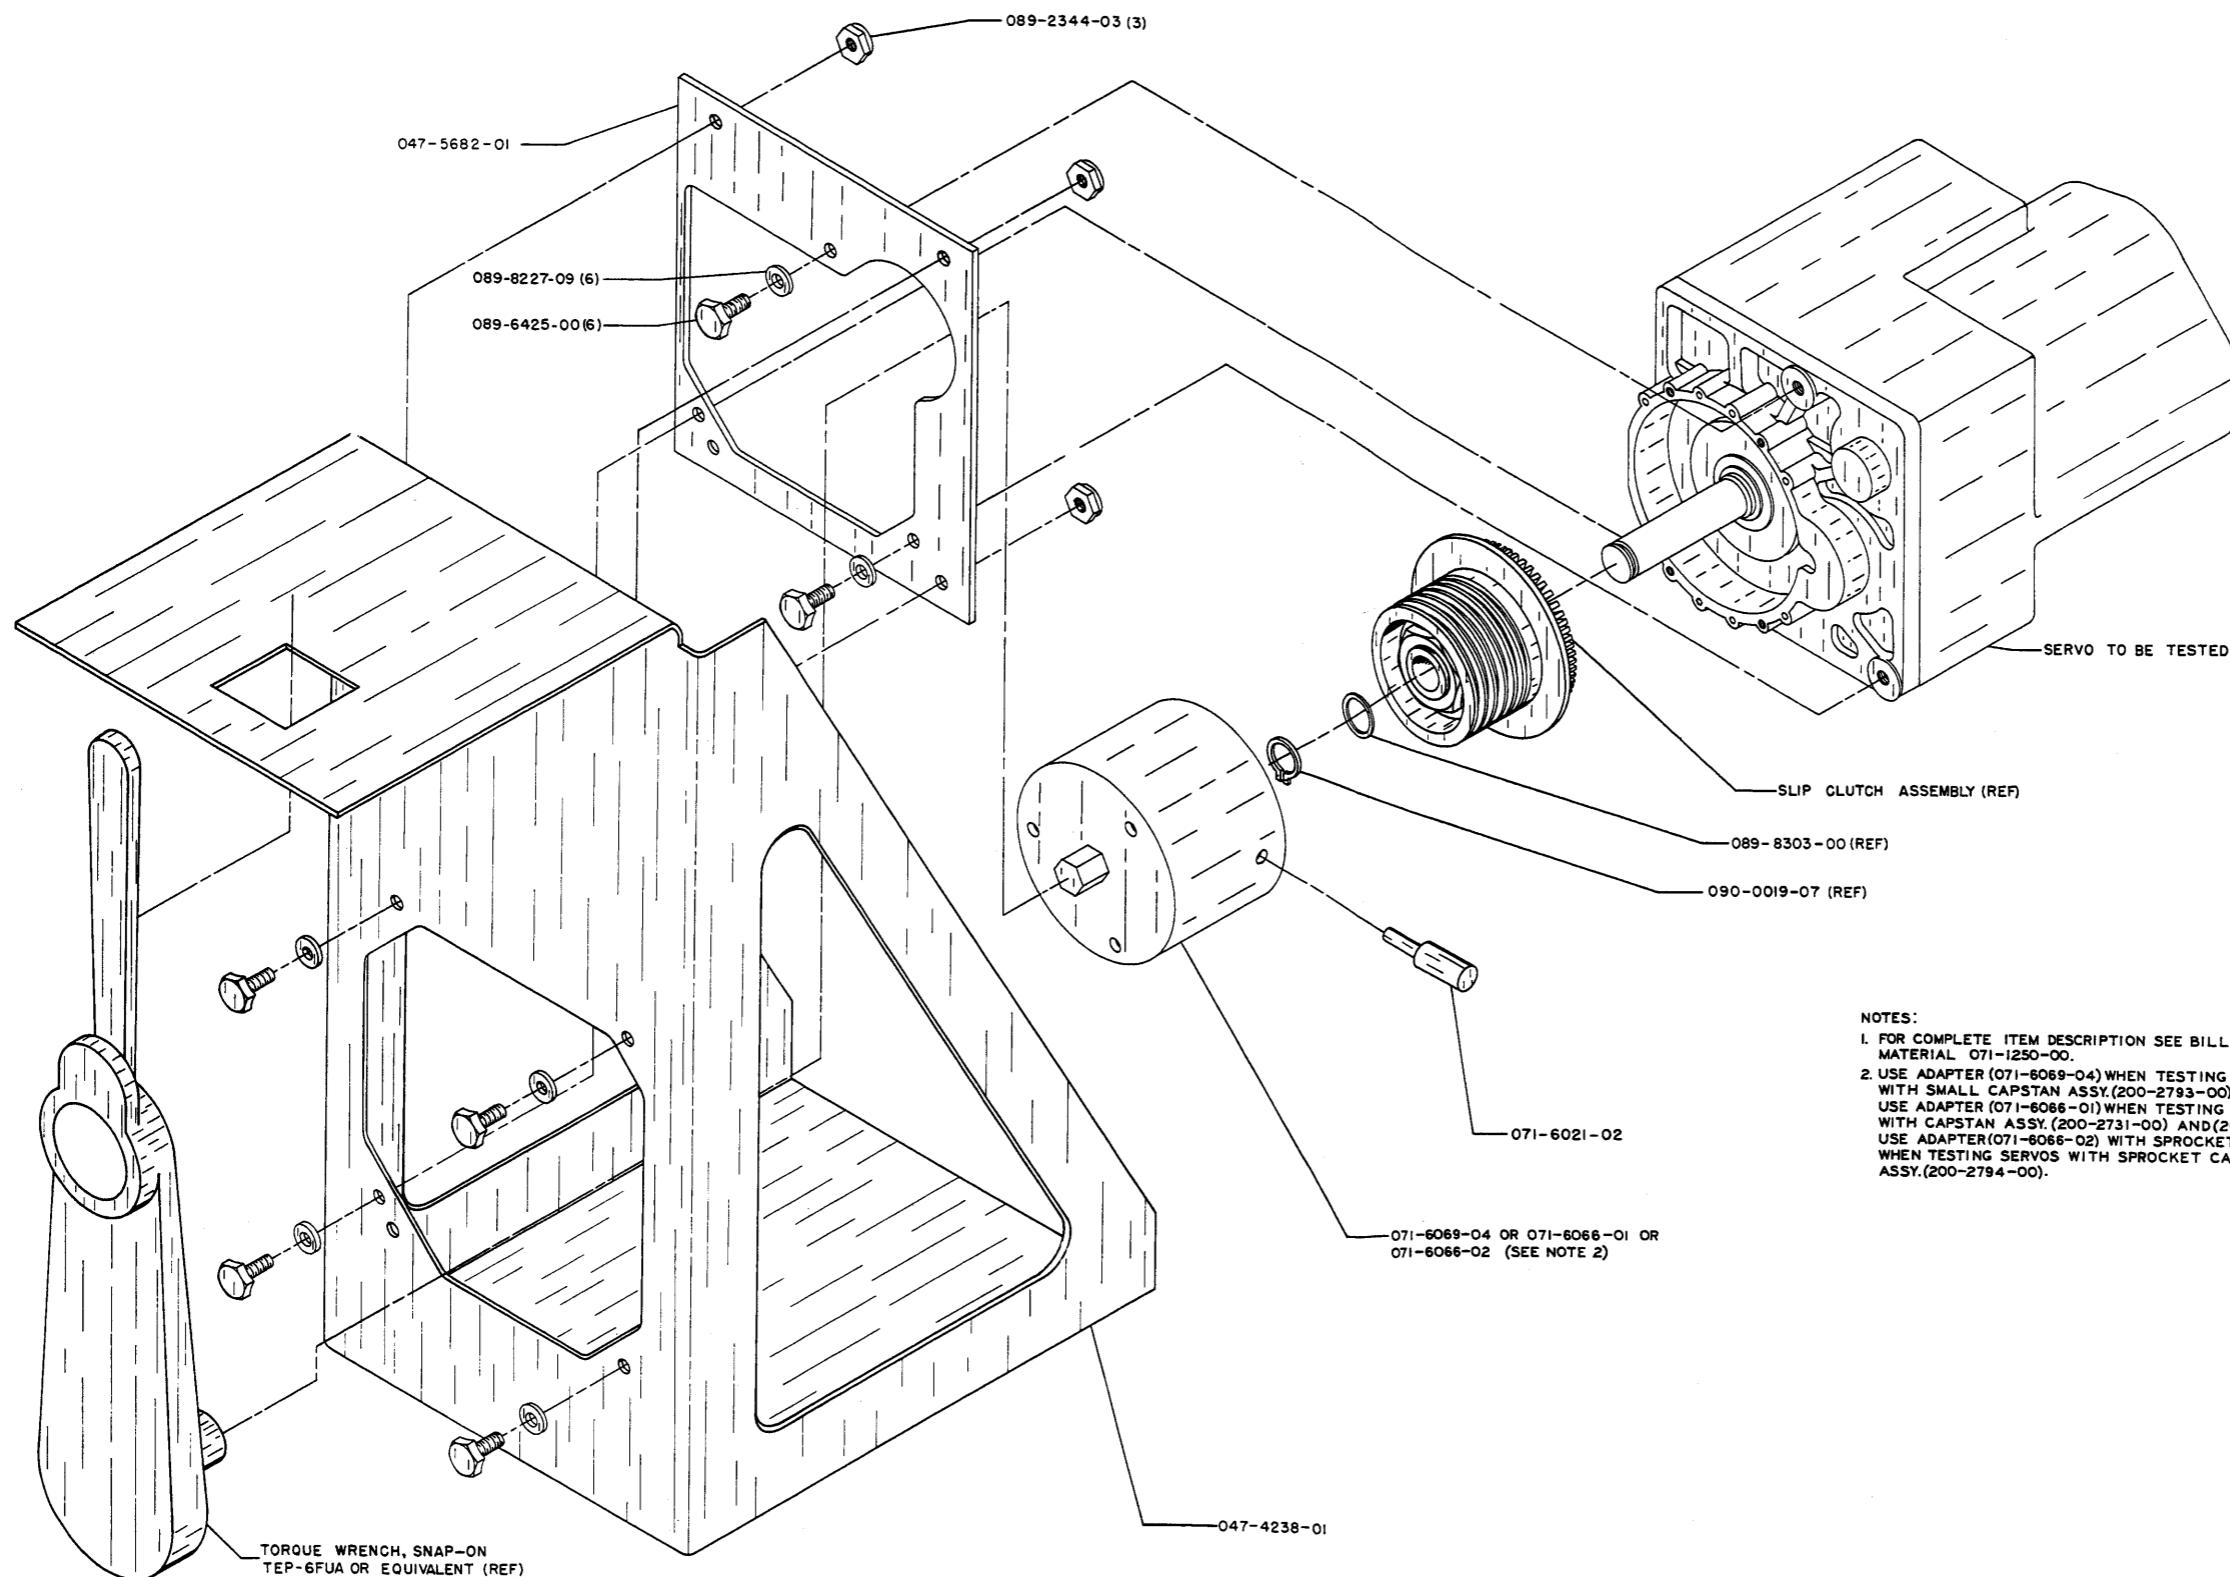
KS 179 SERVO TEST SET ASSEMBLY
